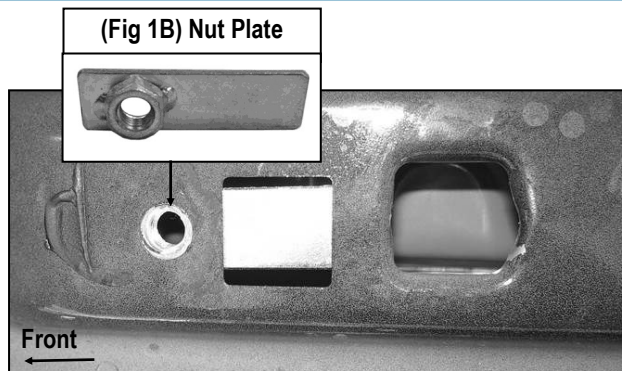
Driver Side Center/Rear Mounting Location (Vehicles with open mounting location)
